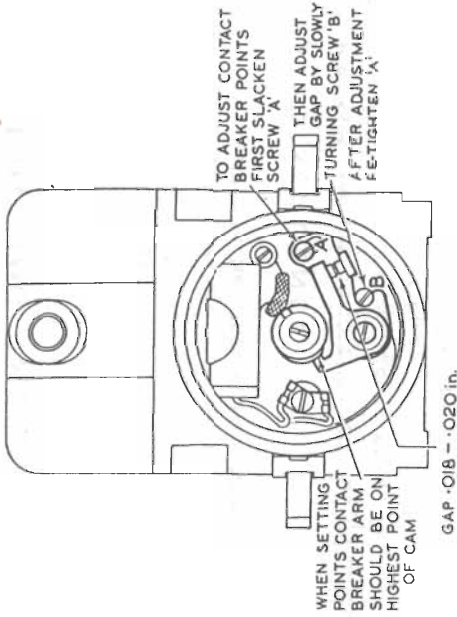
ADJUSTING MAGNETO CONTACT BREAKER POINTS
